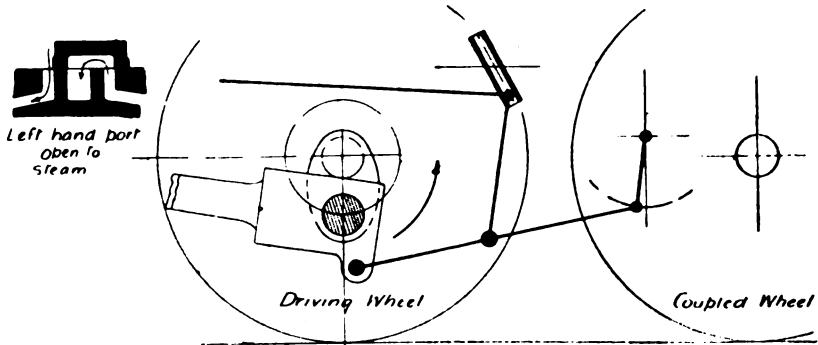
LEFT-HAND PORT OPEN; BIG END ON THE BOTTOM CENTRE.
